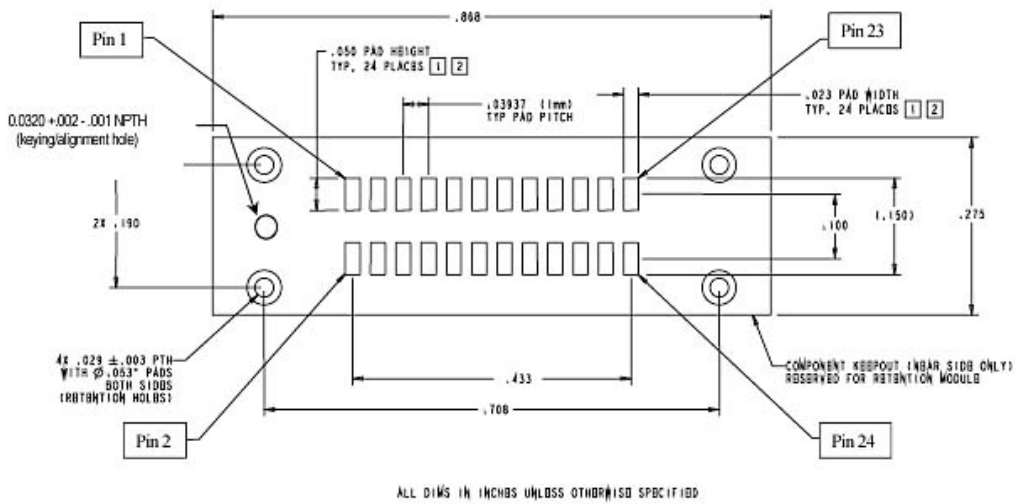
PCI Express LAI industry standard half size footprint dimensions, pin numbering, and specification
